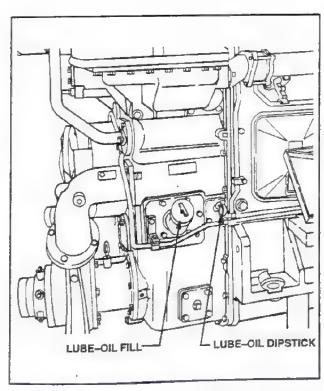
DIESEL ENGINE LUBE-OIL DIPSTICK AND FILL. E-32795A.
